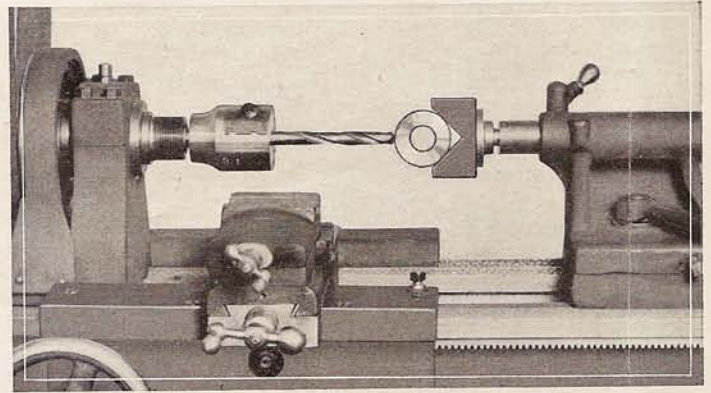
Drilling Through a Round Collar using a Crotch Center in the Tail Spindle of the No. 22—9-inch Junior Lathe
